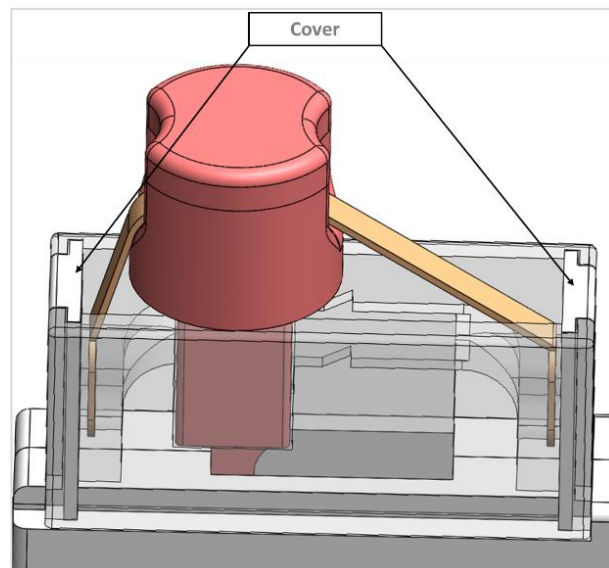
Full Assembly of the Sliding Elements' Locking Mechanism
